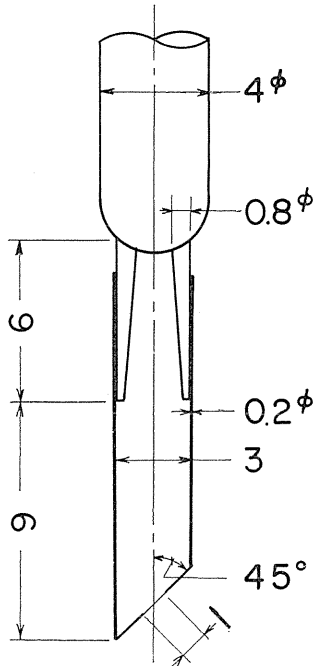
Dimensions of inclined sensor hot wire probe used.
